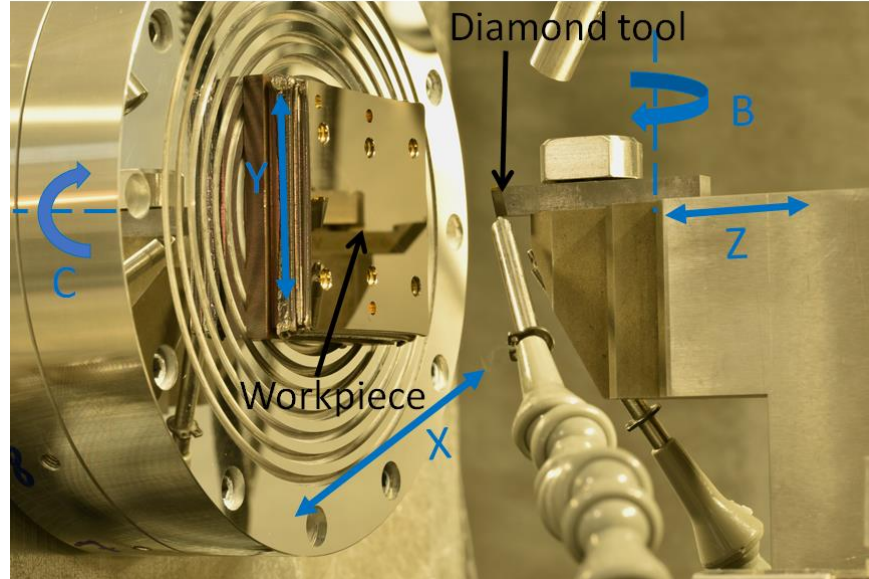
Mould with segmented gratings is made using a 5-axis ultra-precision diamond tooling machine from Moore Nanotech.
